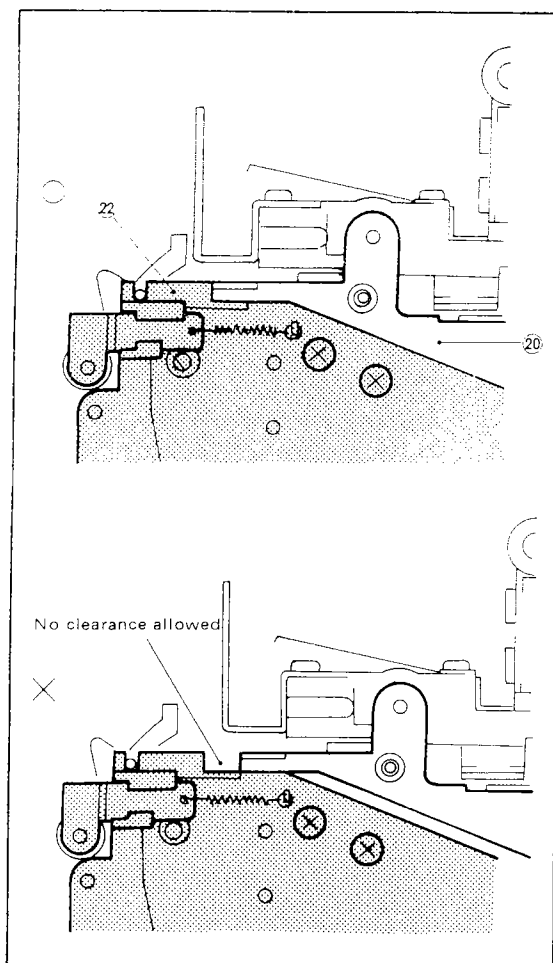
Replacing Die Cast Chart Drive Unit Assembly.
